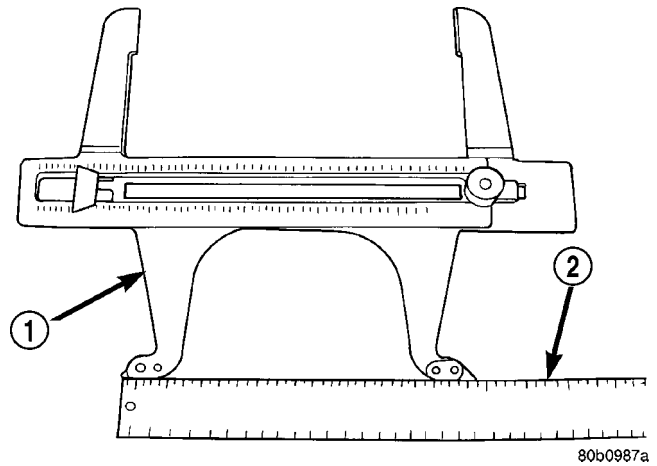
READING PARK BRAKE DRUM DIAMETER
